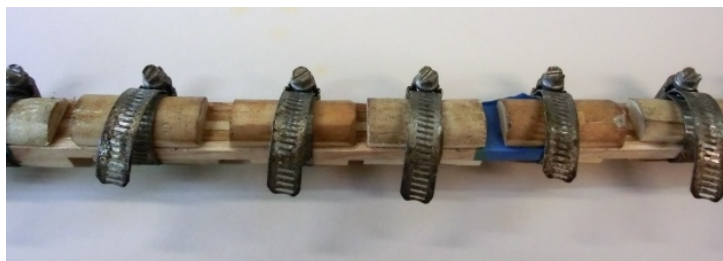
Clamping the core. The aluminum strip underneath the core is not visible. You can see one of the masking tape wrappings that loosely secure the whole assembly before the clamps are secured.
